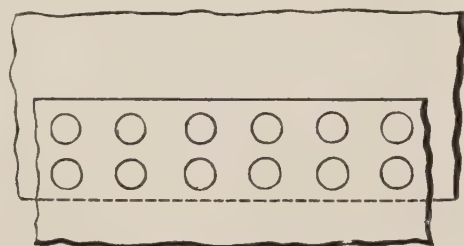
EDGE LAP JOINT: DOUBLE RIVETING.
